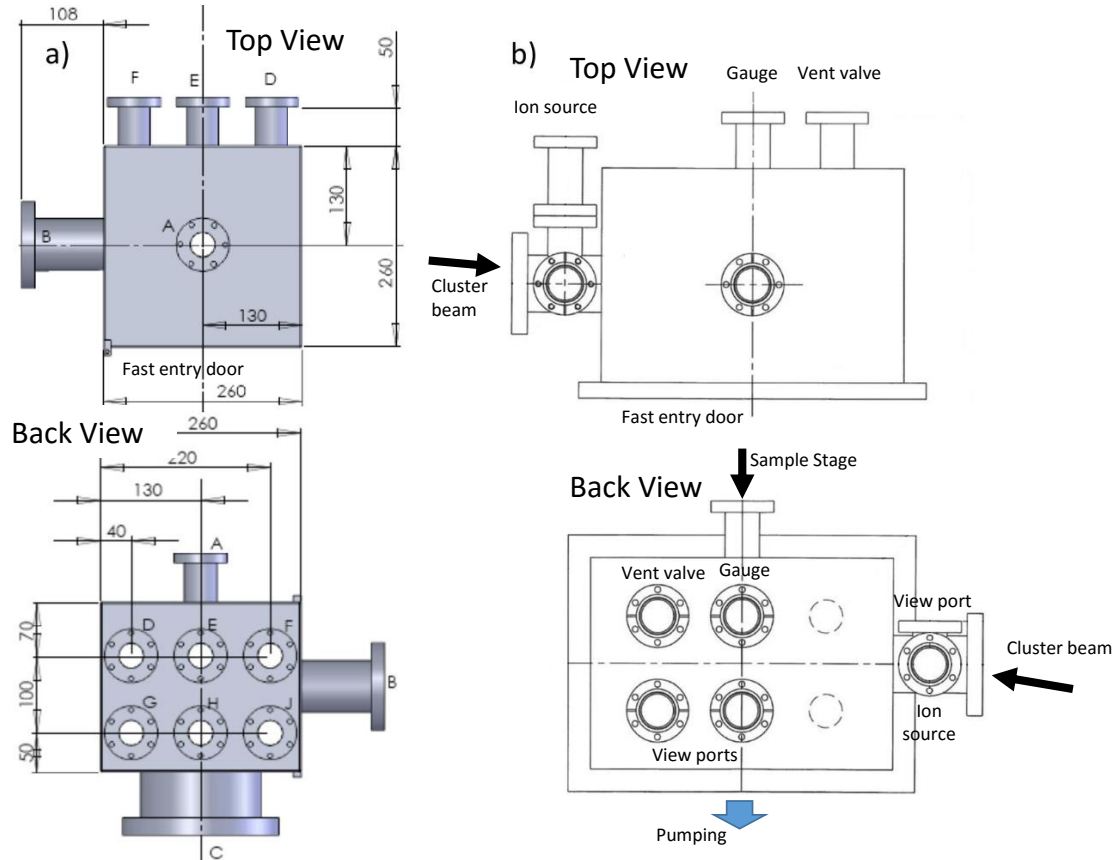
Technical drawings of the carousel deposition chamber; a) presents the drawing of the as supplied box chamber for housing the carousel. b) shows the modified chamber, with this configuration the ion gun can be mounted from the back, close to the carousel deposition surface ( $\sim 8$  cm). The ports are used as follows A is a sample stage, B cluster beam inlet, C pumping port, D vent valve, E gauge, G and H are view ports, F and J have been removed in modification. The removal of the two back ports gives space for a larger ion source to be mounted in future configurations. The additional top port can be used for either a Faraday cup or view port.
